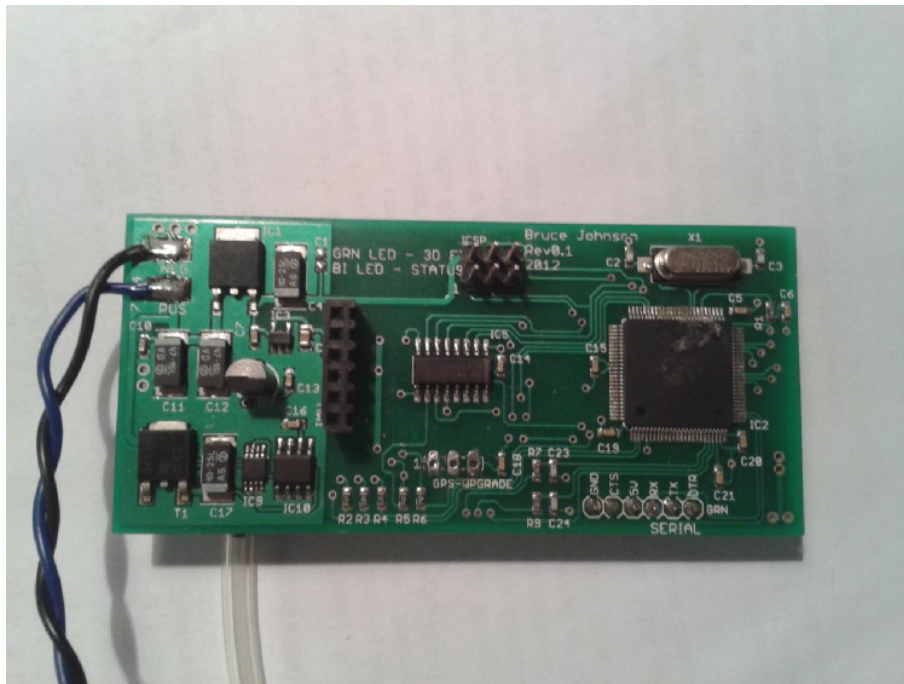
Figure showing a bottom view of the final system board. The power supply section can be seen on the left hand side of the board.
